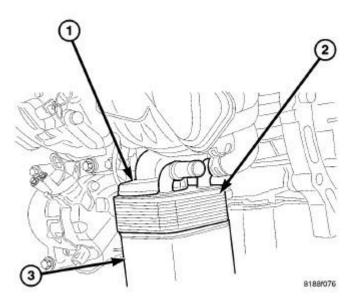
Oil Cooler Adapter, Oil Cooler & Oil Filter Courtesy of CHRYSLER GROUP, LLC
